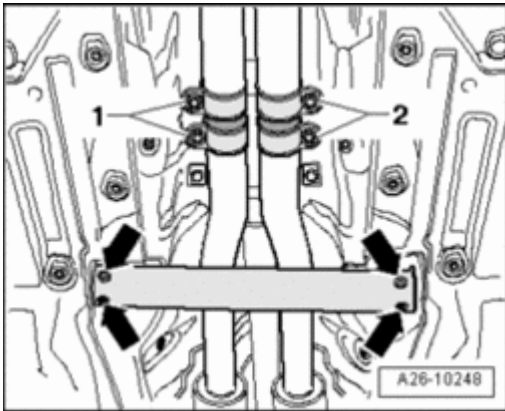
Loosening Double Clamps And Sliding Toward Front
